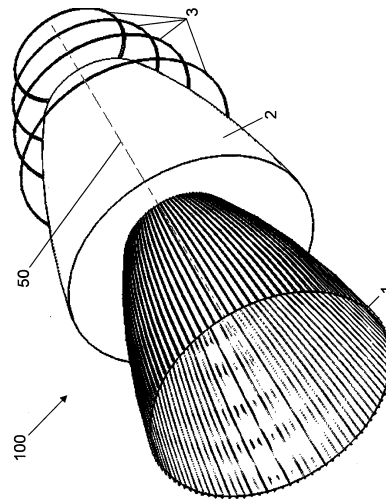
Rocket nozzle: schematic drawing of a rocket nozzle illustrating the inner liner material with axial cooling channels marked with number 1 and the jacket material marked with number 2, see Mäding [82].
